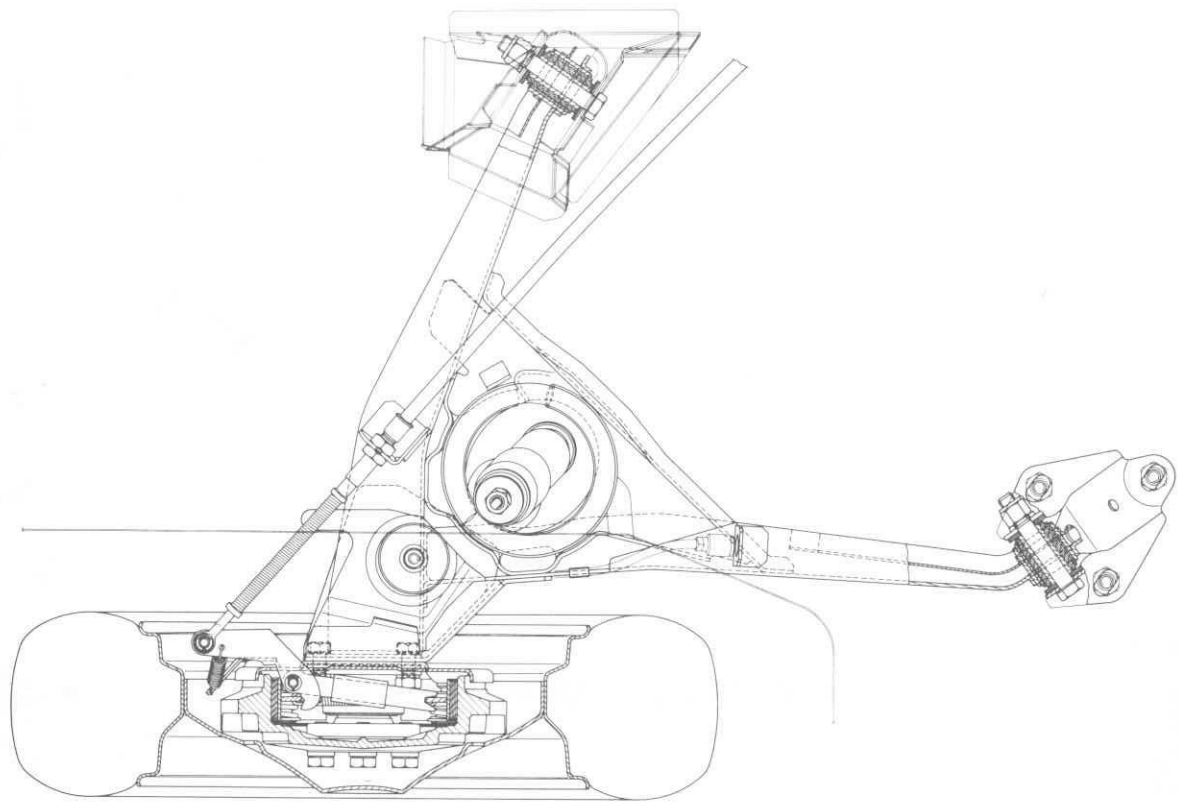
1 Plan view of suspension showing control arm pivots and brake drum in section
